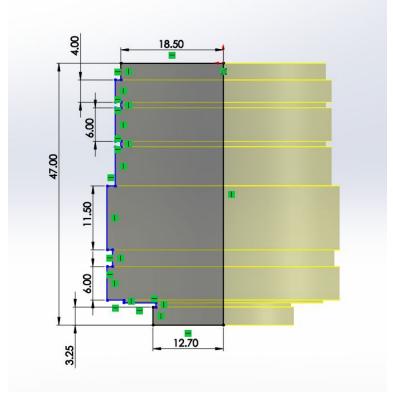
Dimensioned Drawing of the Navitar 25mm SWIR Lens for the Cirrus Flux Camera
